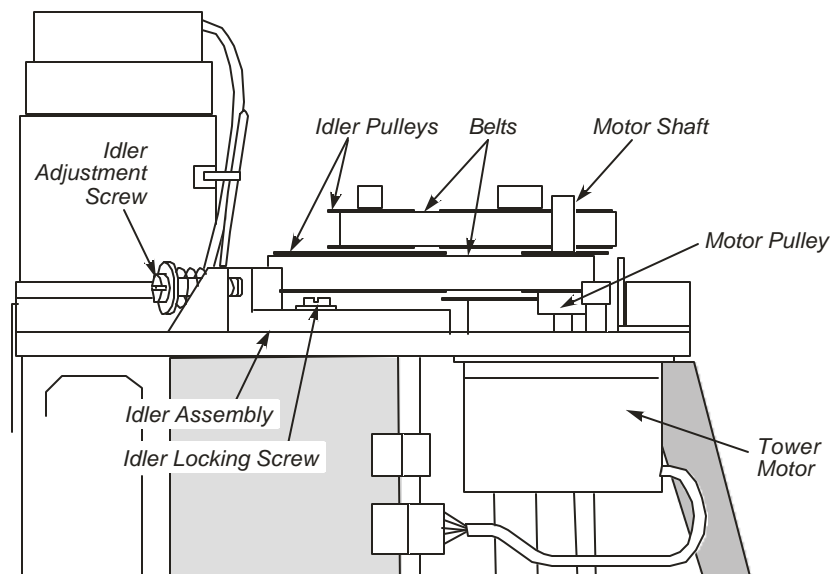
39 Location of Idler Assembly, Belts, and Pulleys.
